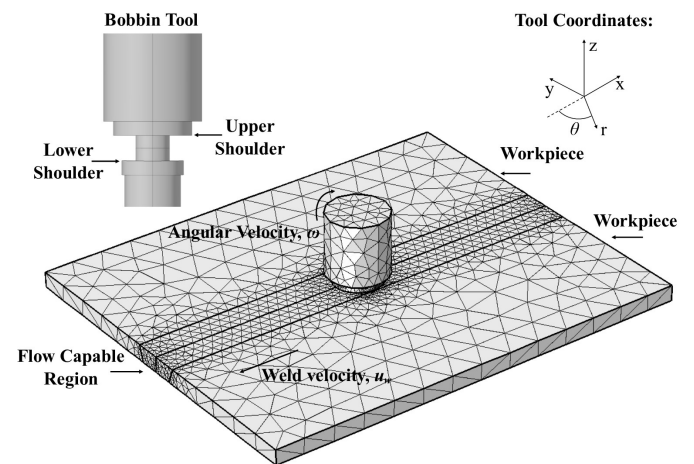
Computational model of friction stir welding process and schematic of bobbin tool
